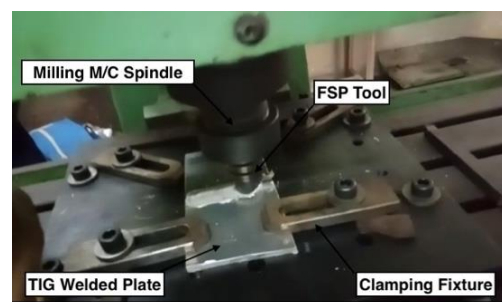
FSP Tool Having Cylindrical Pin ProfileFigure 3. FSP setup on milling machine
